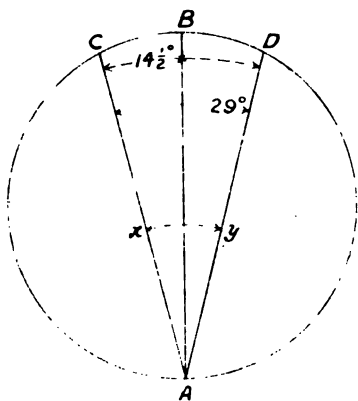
Obtaining the Shape of Tool for Cutting Worms.
